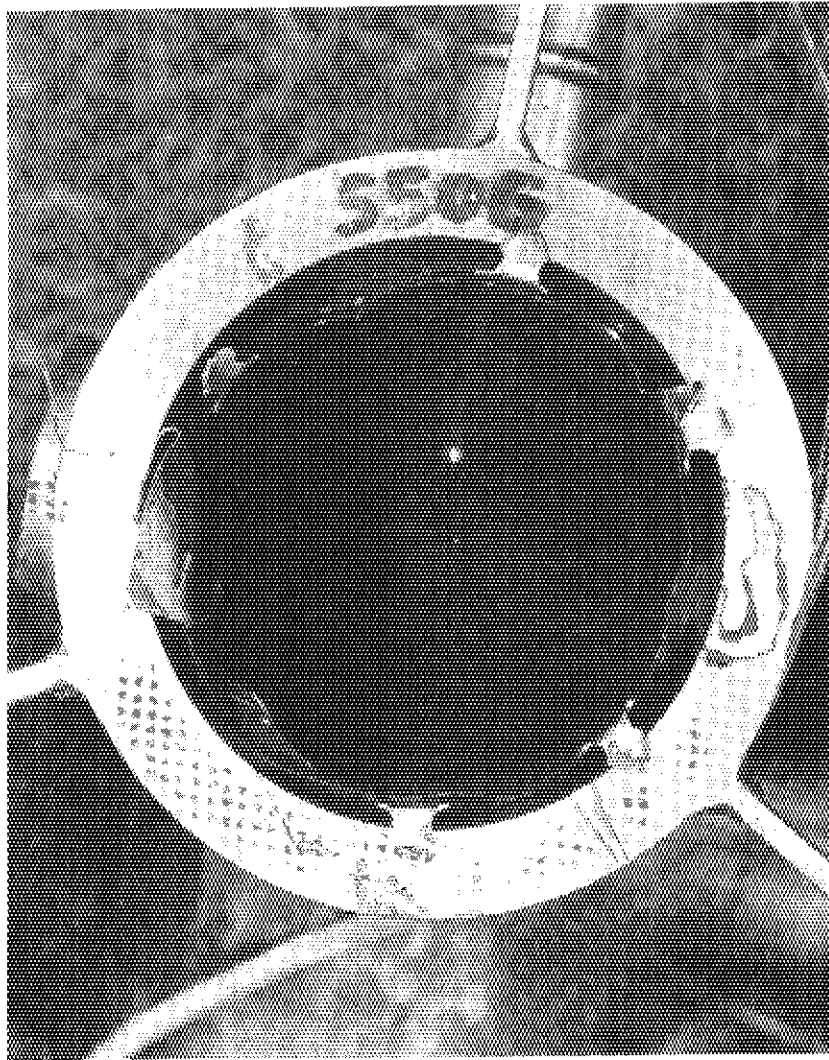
Typical photograph of vertical cross-section of welded rupture disk after break
